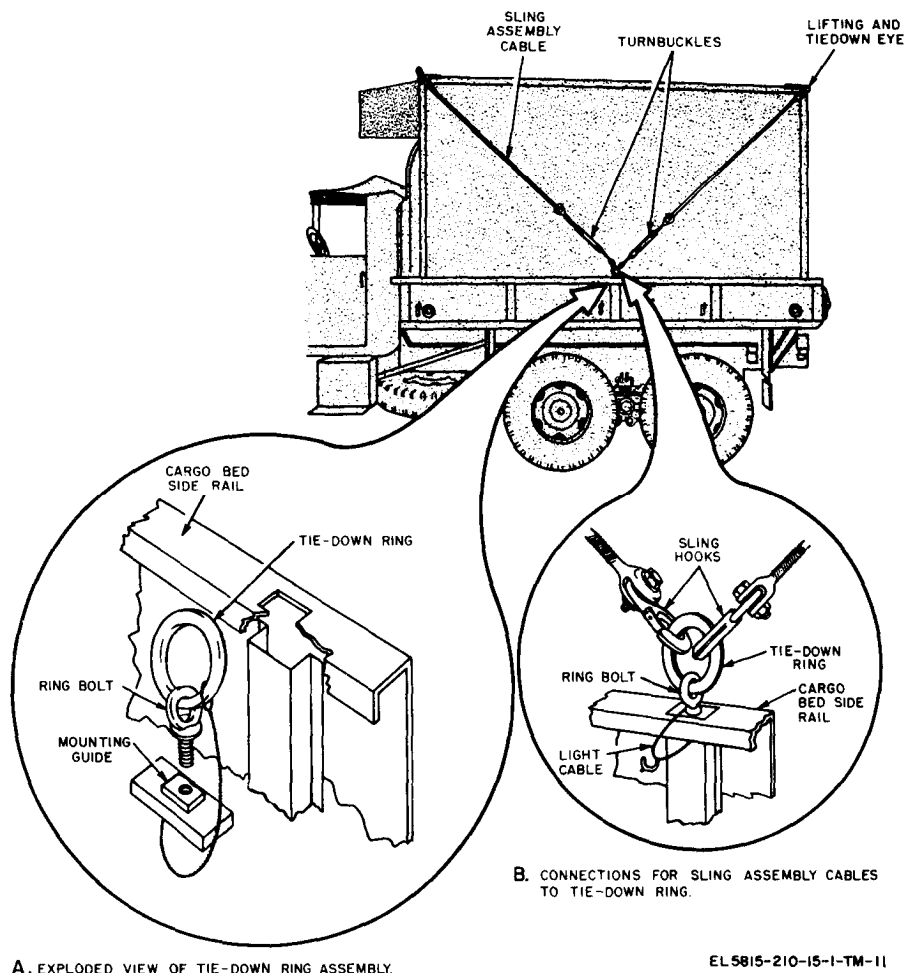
Tiedown ring assembly and sling assembly connection diagram, exploded view
